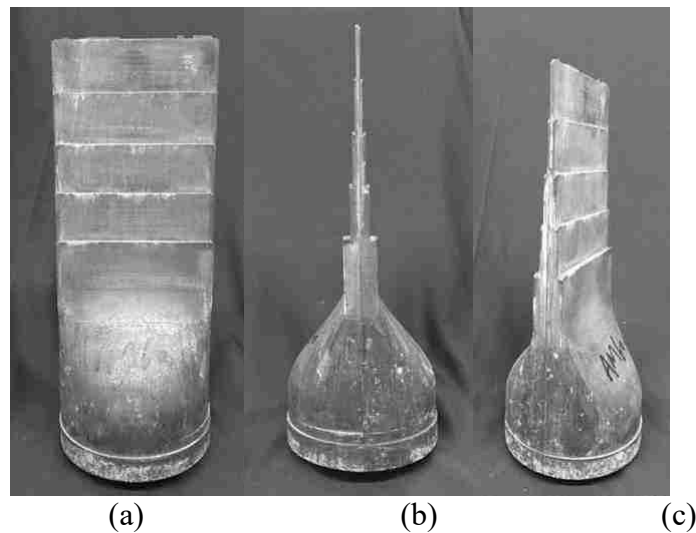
5: A typical 5-step squeeze casting solidifying under an applied pressure of 60MPa, (a) front view, (b) side view and (c) isometric view.
